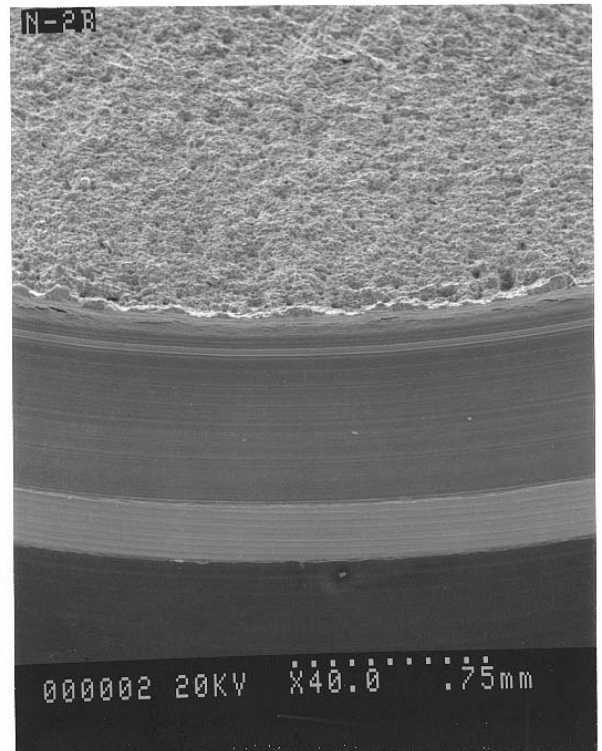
Specimen N-2B after the tensioning to fracture. Fracture face (below) shows initiation at bottom of view and final shear lip at top.
